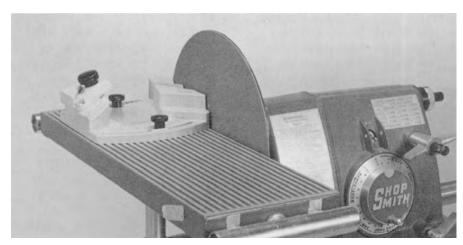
To sharpen lathe chisels, mount the sharpening guide on the extension table only.
